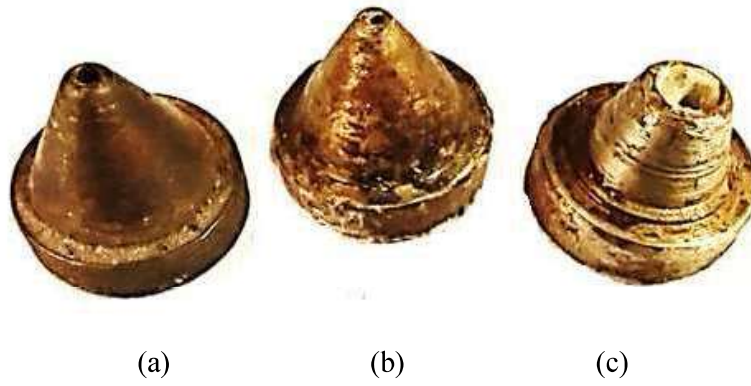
Extruder nozzles of hole diameter (a) 2 mm (b) 1.5 mm, and (c) 2.5 mm.
